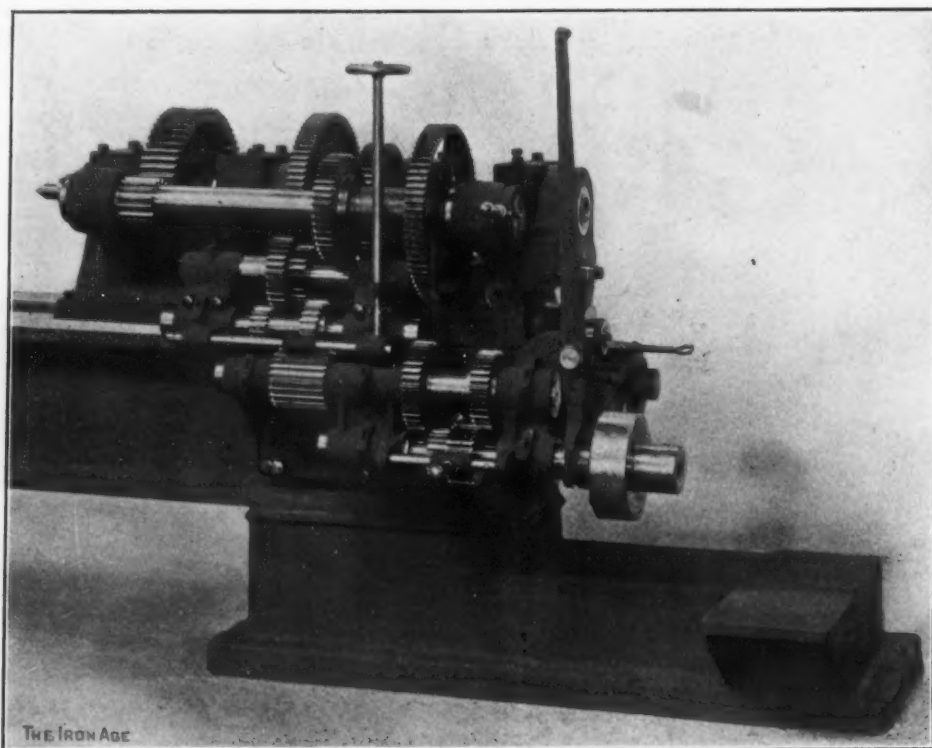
A Rear View of a Special Geared Head Lathe Adapted for Constant Speed Motor Drive.
